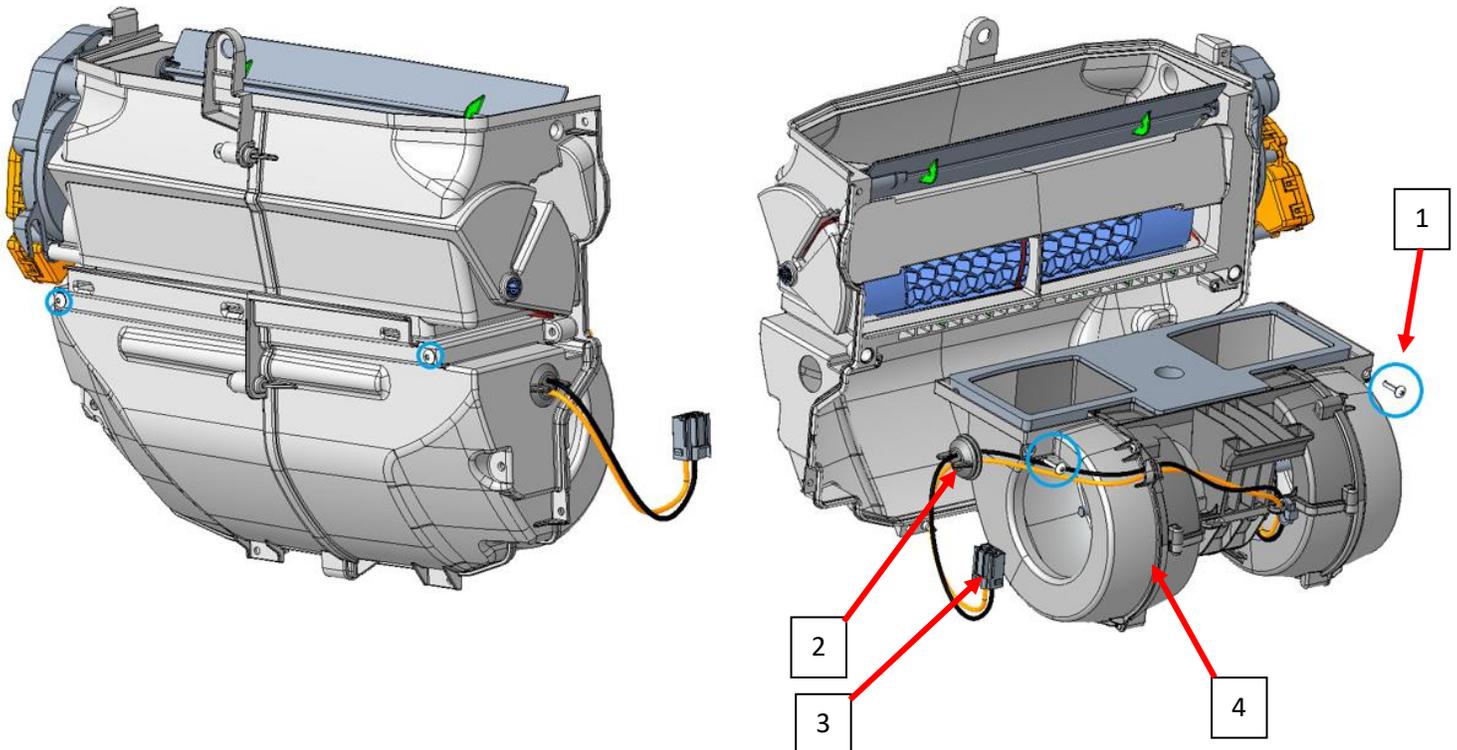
Blower Assembly Separated from Blower Scroll Housing
